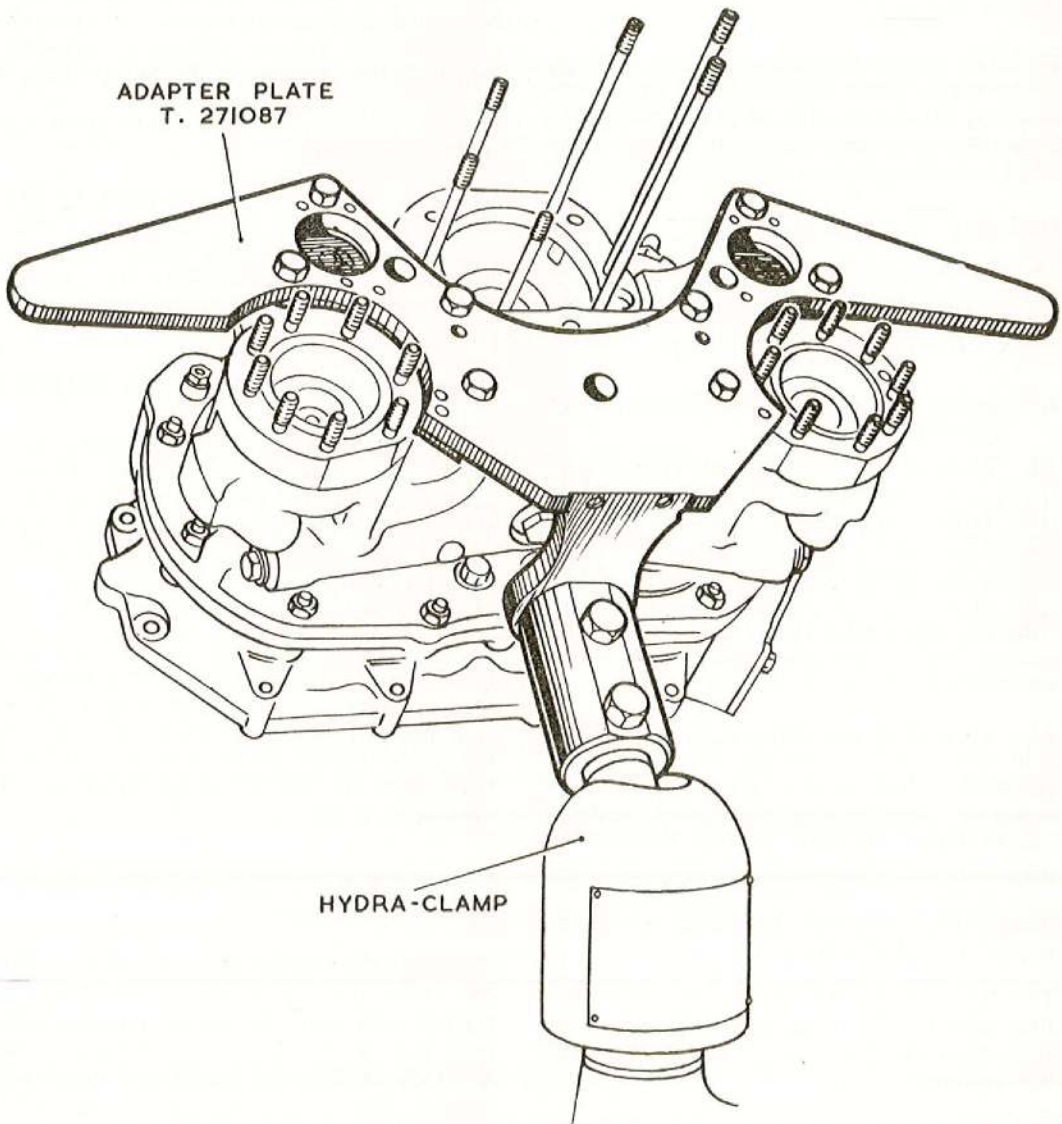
ASSEMBLING AND DISMANTLING FIXTURE
